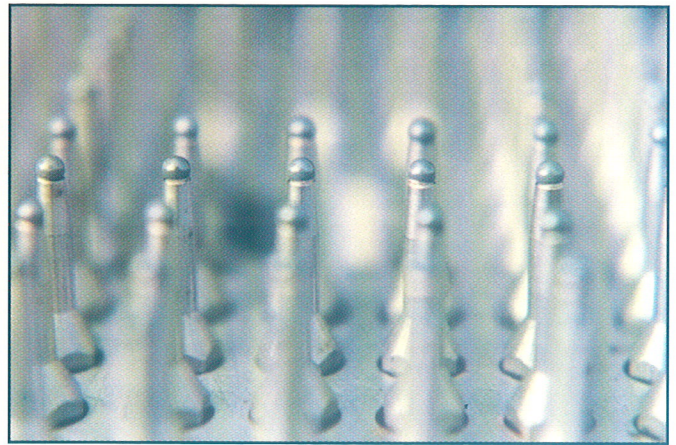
Glass-to-metal seal diffusion bond after processing.
